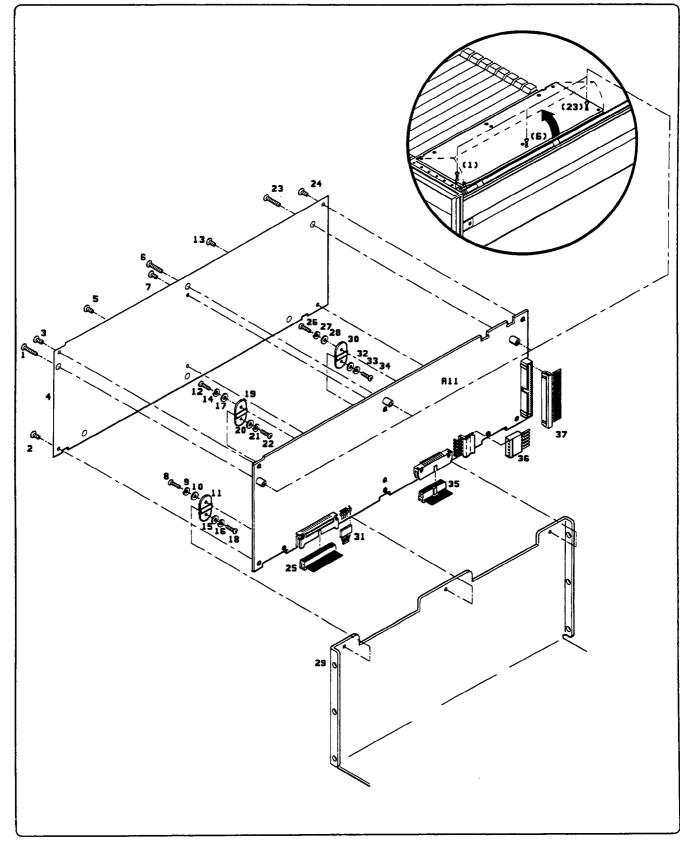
Microprocessor Assembly (Plate, Hinging, Cabling)
